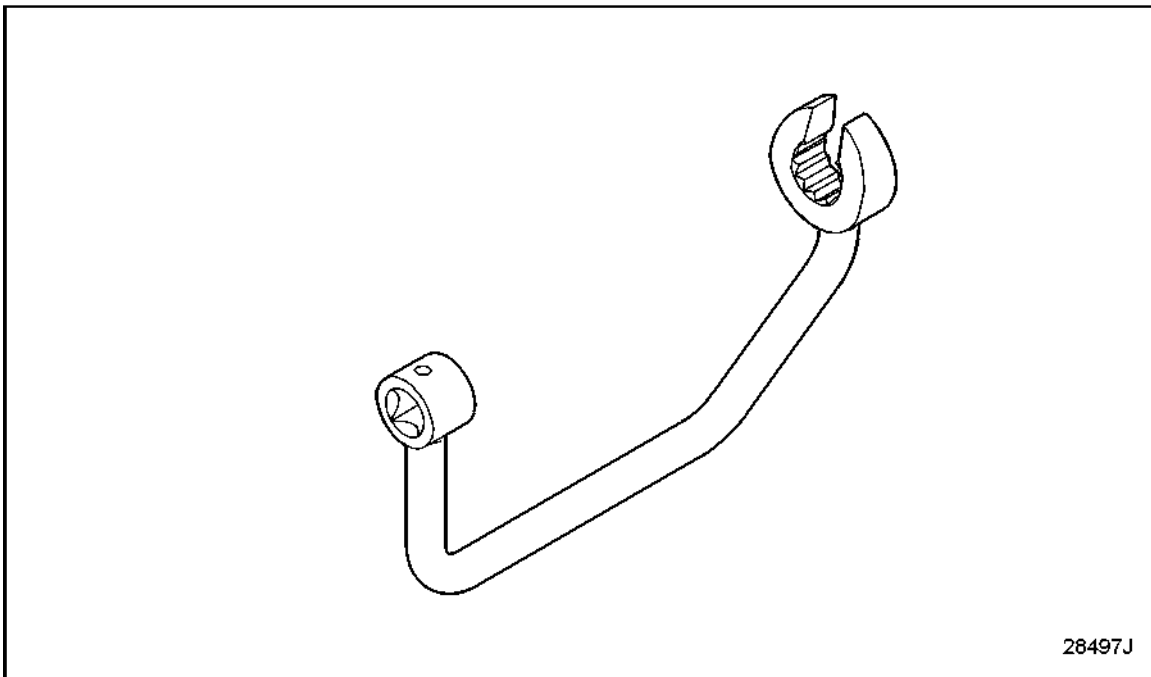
Exhaust Manifest Nut Wrench.J 26816-A
